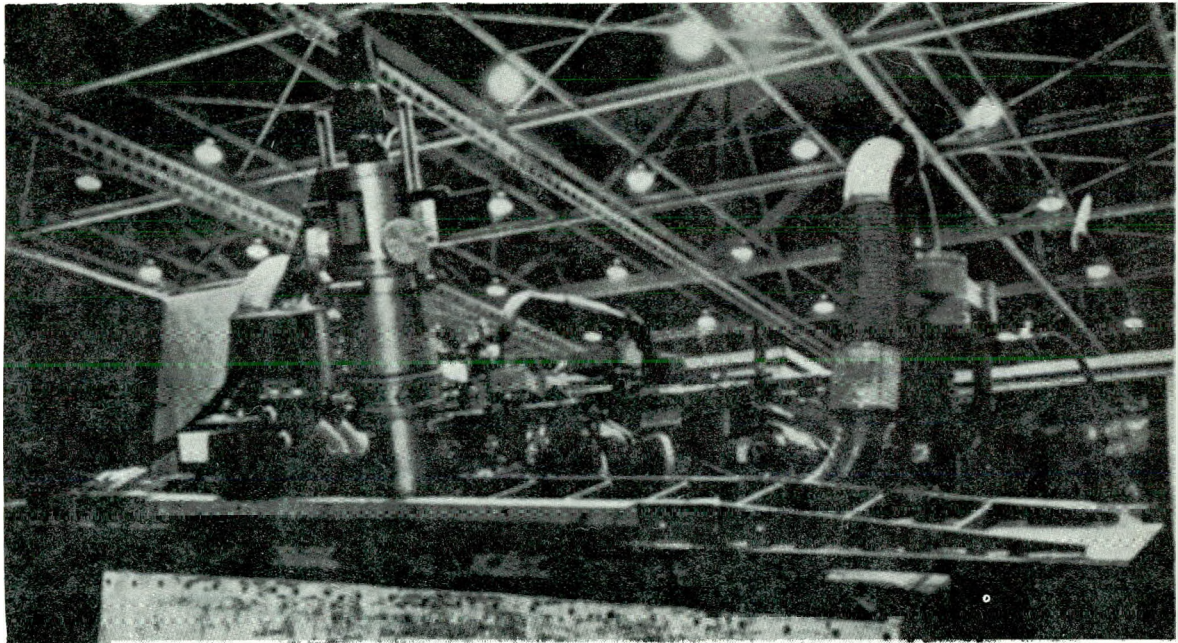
PORTABLE ELECTRON-BEAM WELDER
